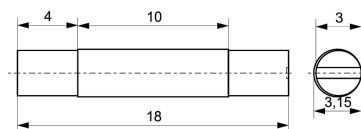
The drawing of the base of the miniature vacuum-compatible bending device. The material is oxygen-free copper.
